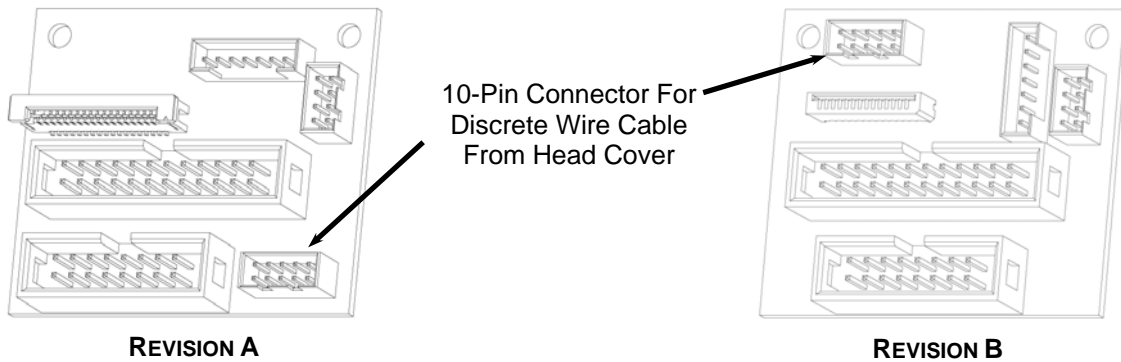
LOCATION OF CONNECTOR FOR HEAD COVER CABLE FOR THE EARLIER REVISION A AND LATER REVISION B MACHINES
